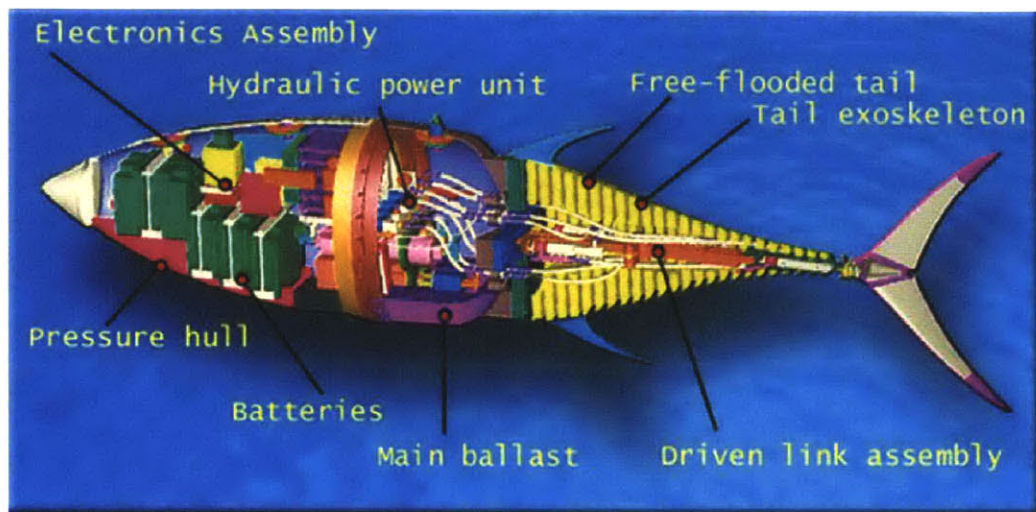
Drawing of the Draper tuna. — Draper Laboratory
